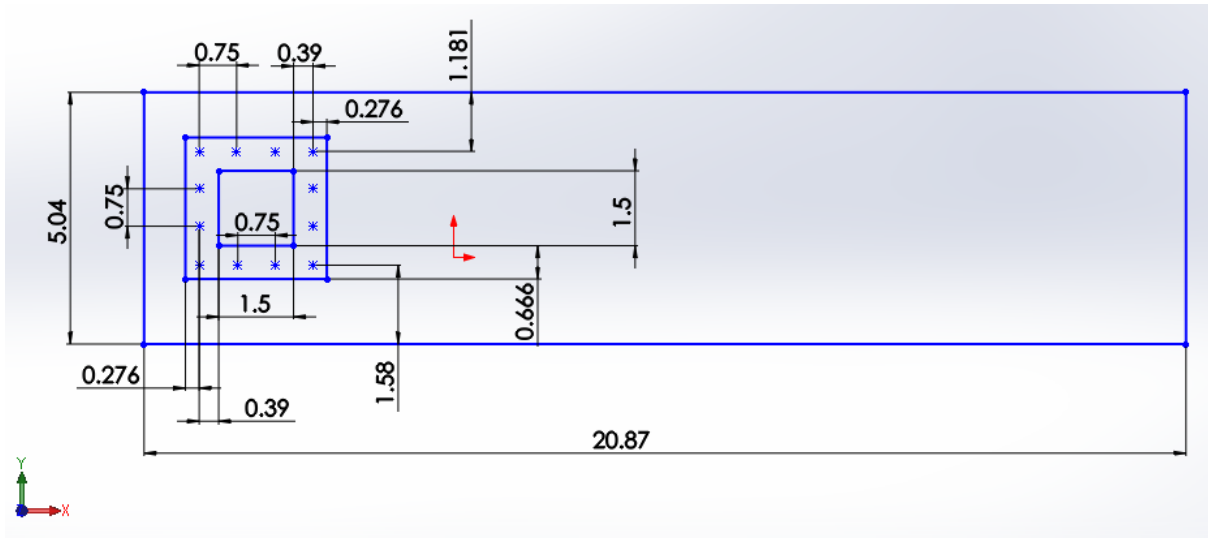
Dimensions of New Repair Design (1.5''x 1.5'')
